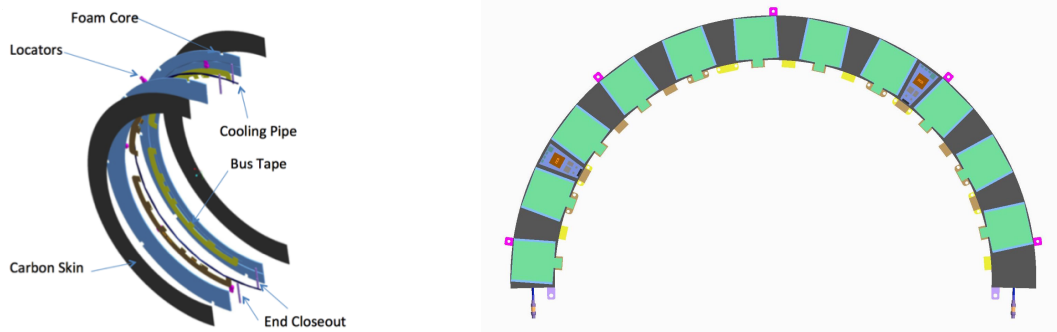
Left: an exploded view of a half-ring showing the internal components. Right: a view of the surface of a half-ring showing pixel modules (green) and PP0 or "EoS" cards (blue). The electrical breaks can be seen in the right-hand drawing, on both ends of the cooling pipe as it emerges from the half-ring.
